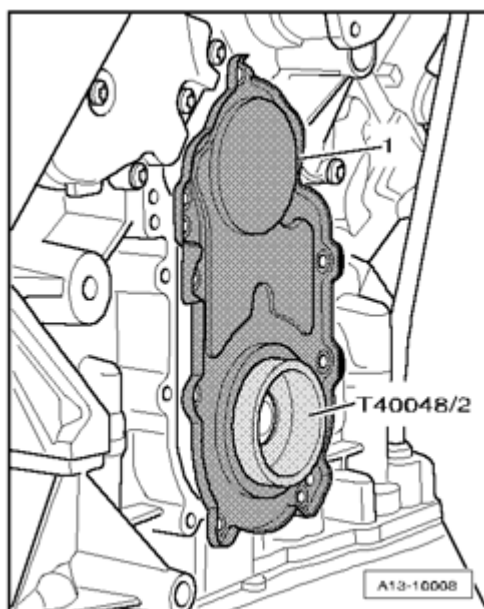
Placing Sealing Flange With Inserted Pull Sleeve T40048/2 Onto Crankshaft
